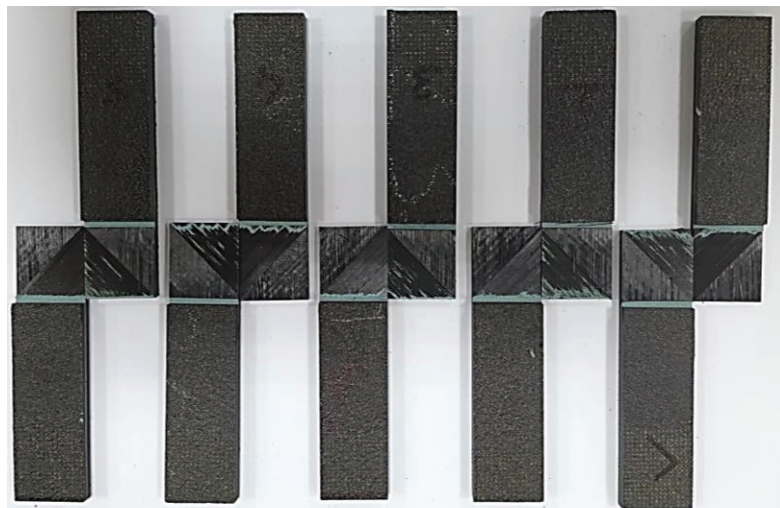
21. Single lap shear test specimen B (laser surface modification with 0.20 mm laser offset distance) after environmental aging
